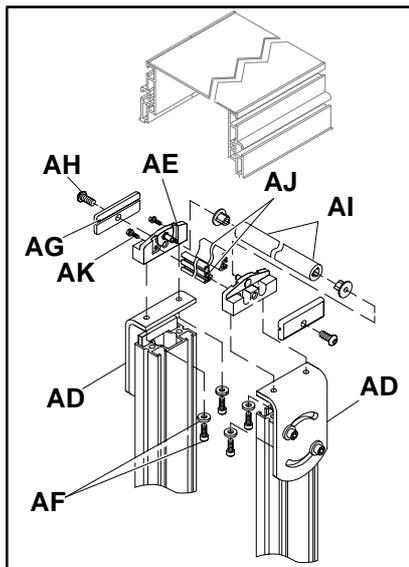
Mounting Bracket with Return Roller Assembly used with a Flat-Belt Conveyor (Wider than 610 mm)
